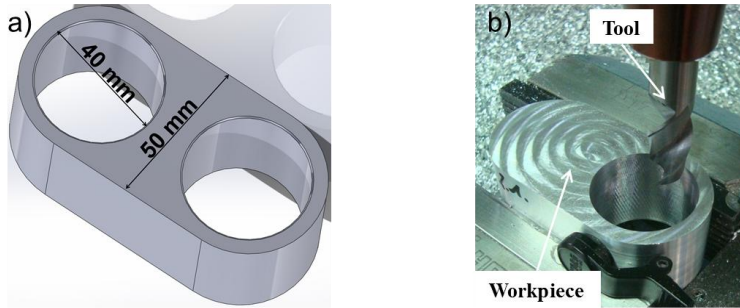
a) CAD model of the workpiece b) Workpiece after first roughing operation
